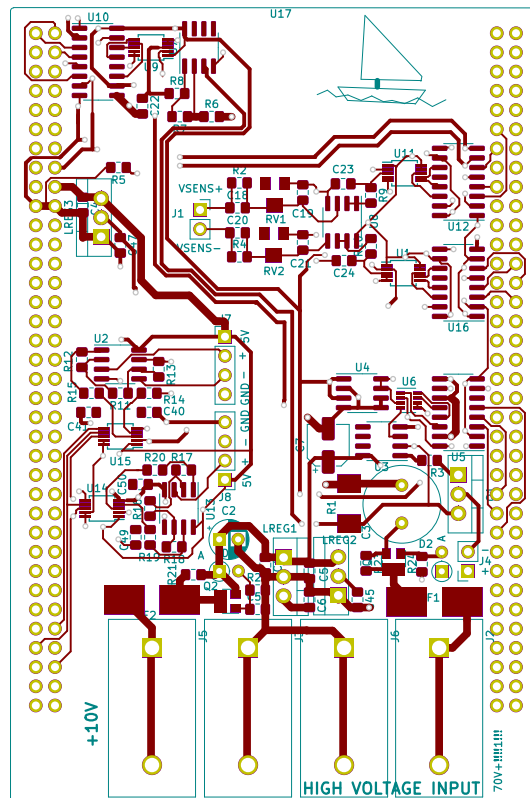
Front of the PCB with Copper Layer, Silkscreen and Mounting Holes
